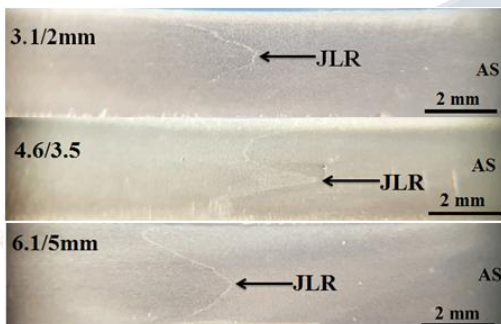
Macrostructures of three different tool pins 3.1/2mm, 4.6/3.5mm and 6.1/5mm at 700rpm.
